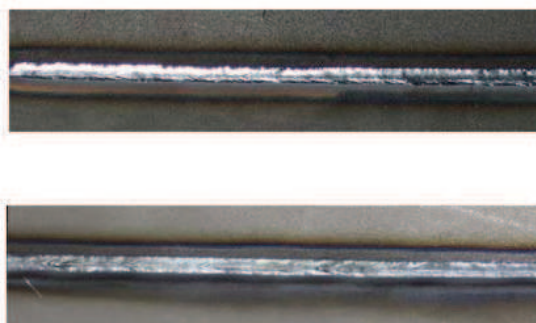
Standard diode laser (1KW) welding results (9.5mm/s), 1.5mm thickness steel
